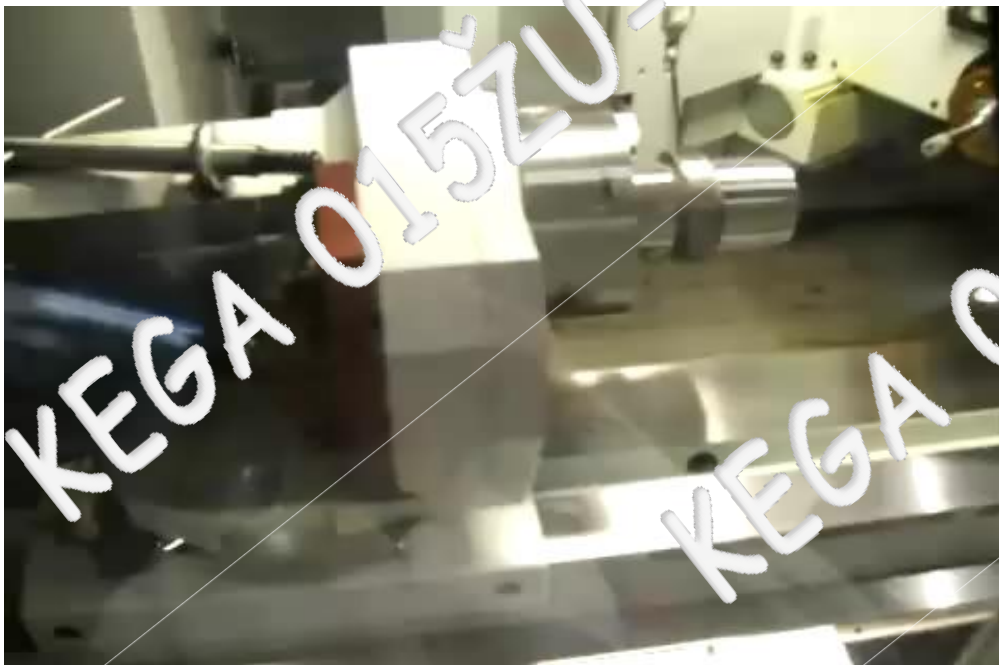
A chucking-type cylindrical grinding operation with the part held in a chuck.
